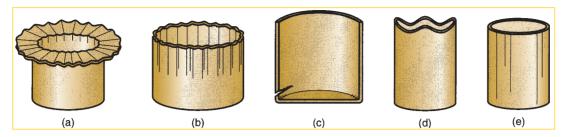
Common defects in drawn parts: (a) wrinkling can occur either in the flange or (b) in the wall, (c) tearing, (d) earing, and (e) surface scratches.
